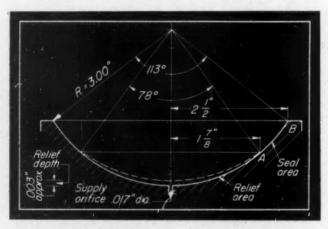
Detail of supporting cup for air-lubricated ball .--Drawing, courtesy Sperry Gyroscope Co. Inc.
